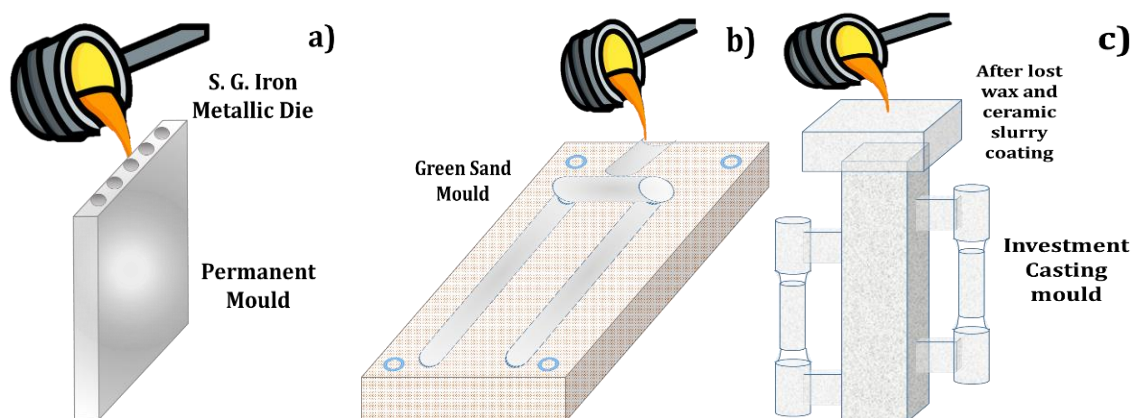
Schematic illustration of casting techniques: a) gravity die casting, b) sand casting and c) investment casting.
